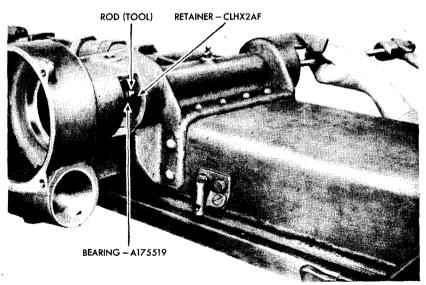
shows the location of oil retainer CLHX2AF and roller bearing A175519 in the left end of the housing.
